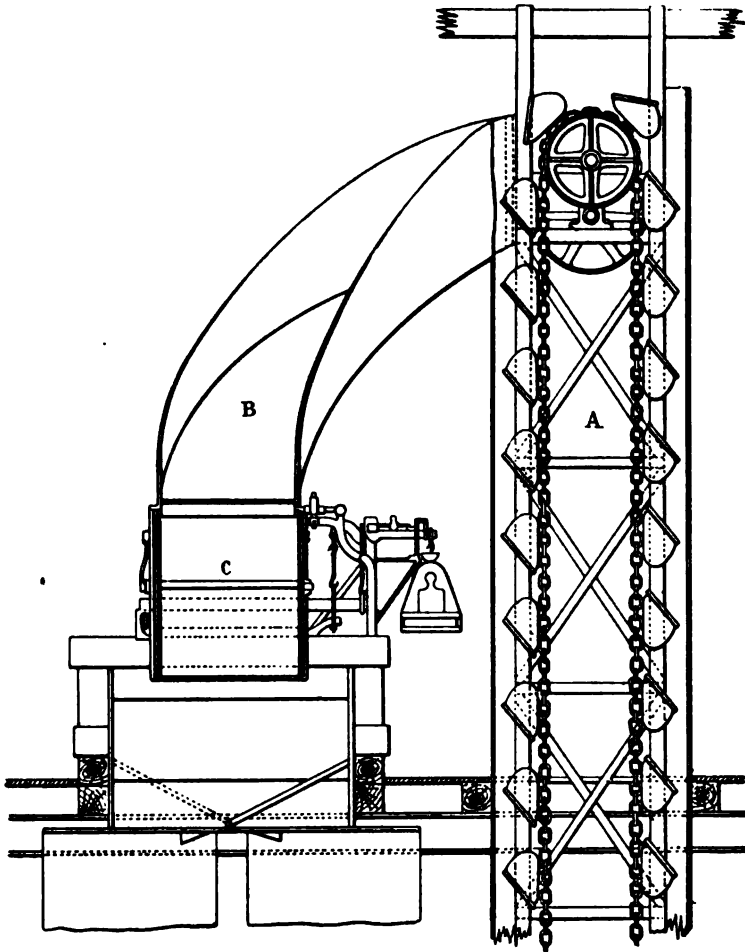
Beet Lift, Iron Buckets, and Chains.
